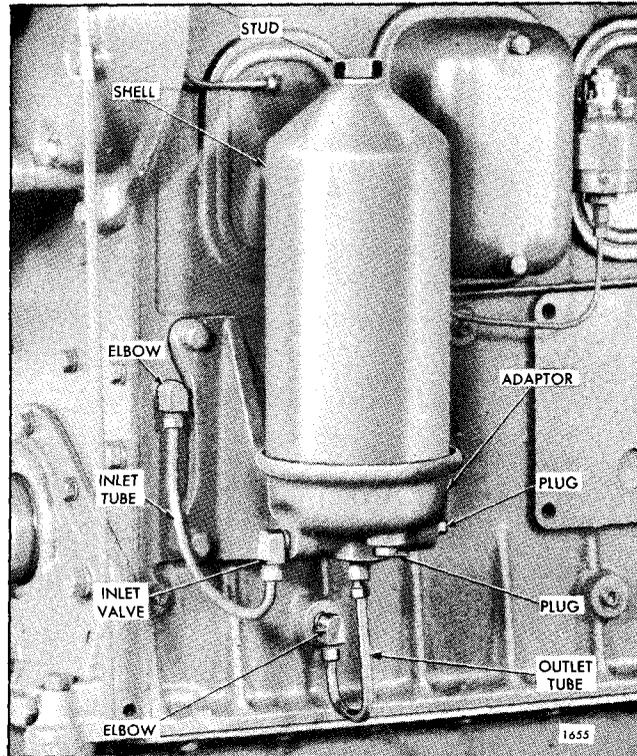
Typical Lubricating Bypass Oil Filter Mounting
